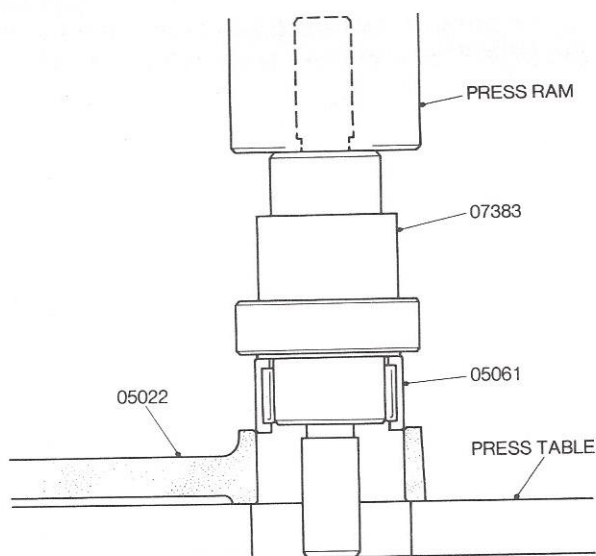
Assembly of the Connecting Rod Needle Roller Bearing
